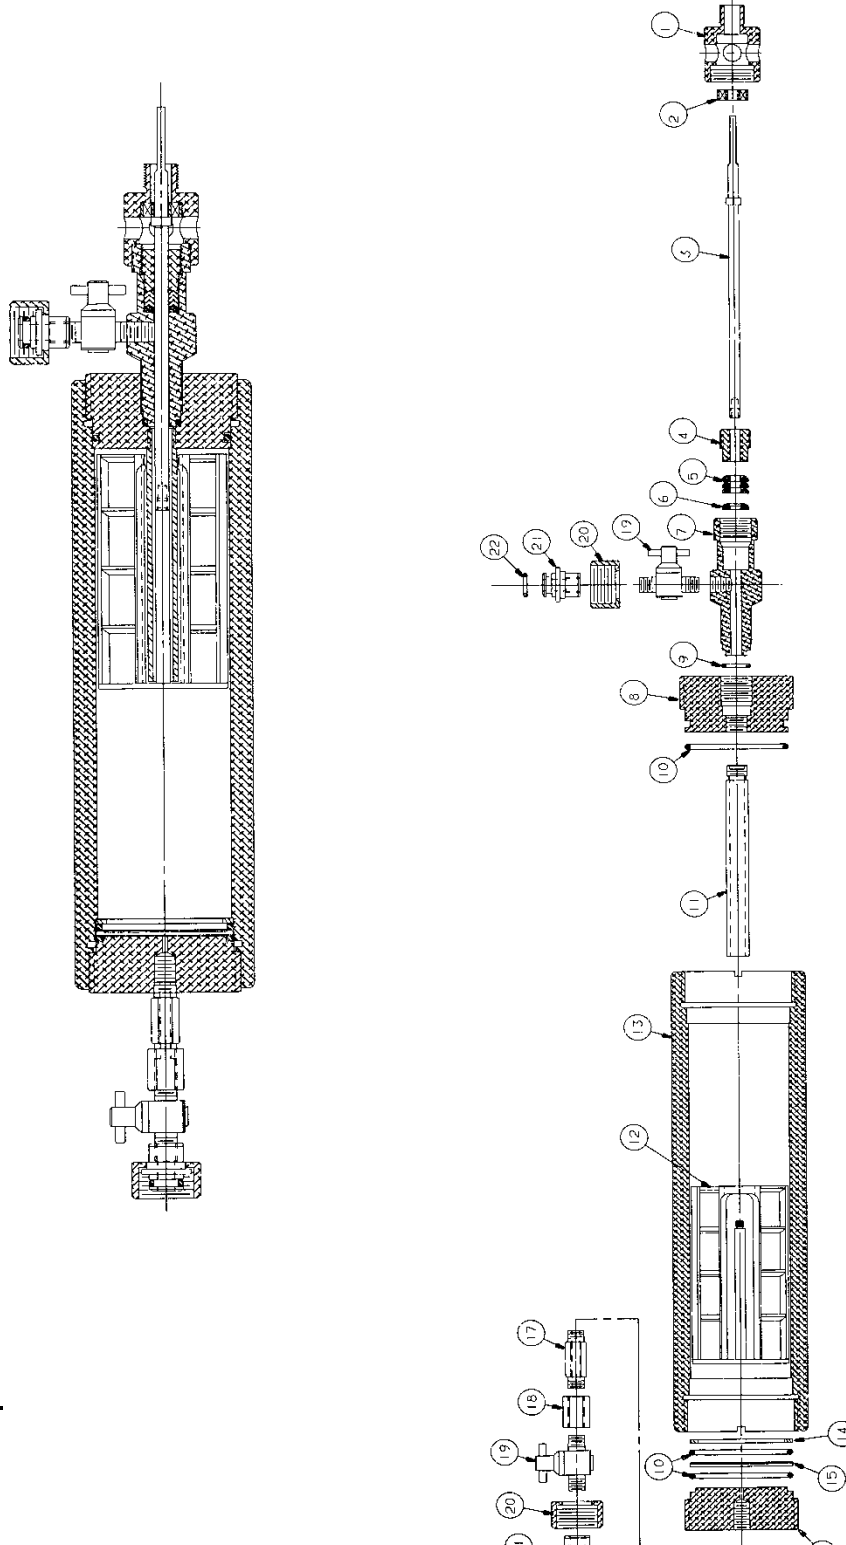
Heating Jacket Assembly Schematic, Part 2 of 2
